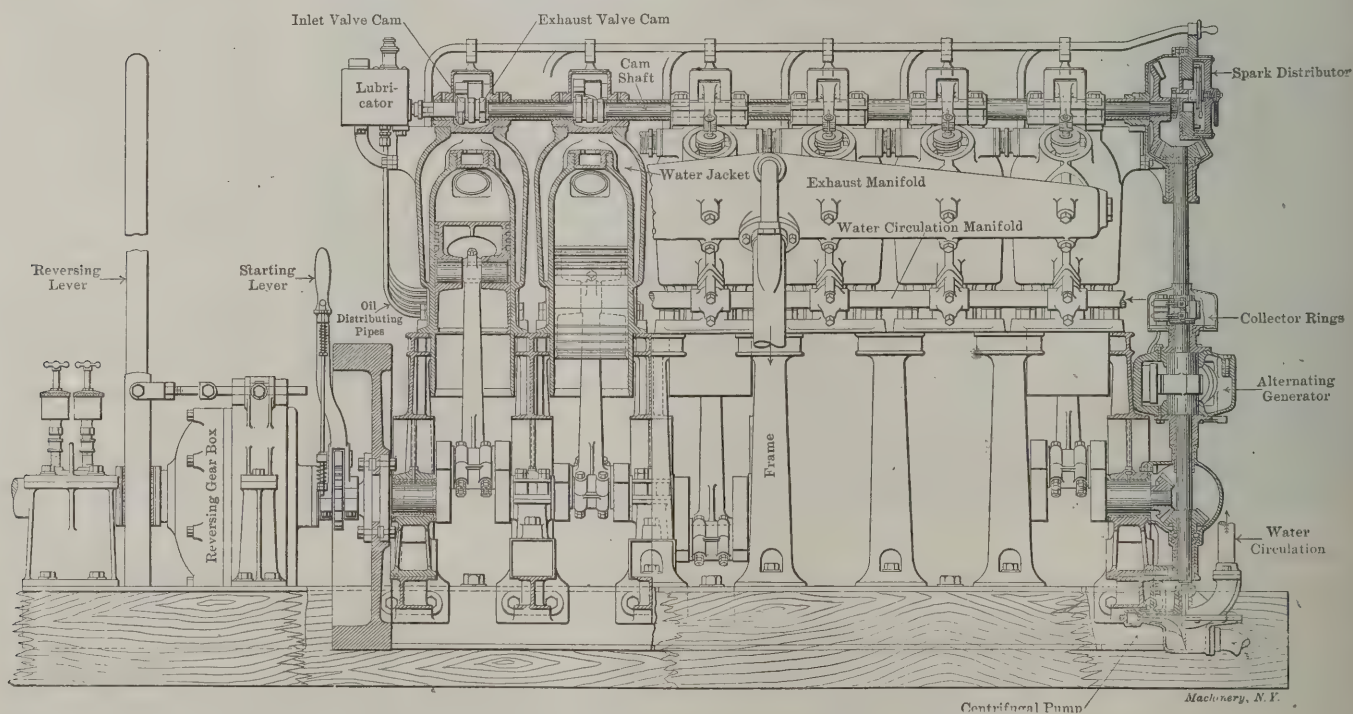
Side Elevation of Hurd & Haggin Six-cylinder Engine, showing the Exhaust Manifold and Section of Cylinders.
